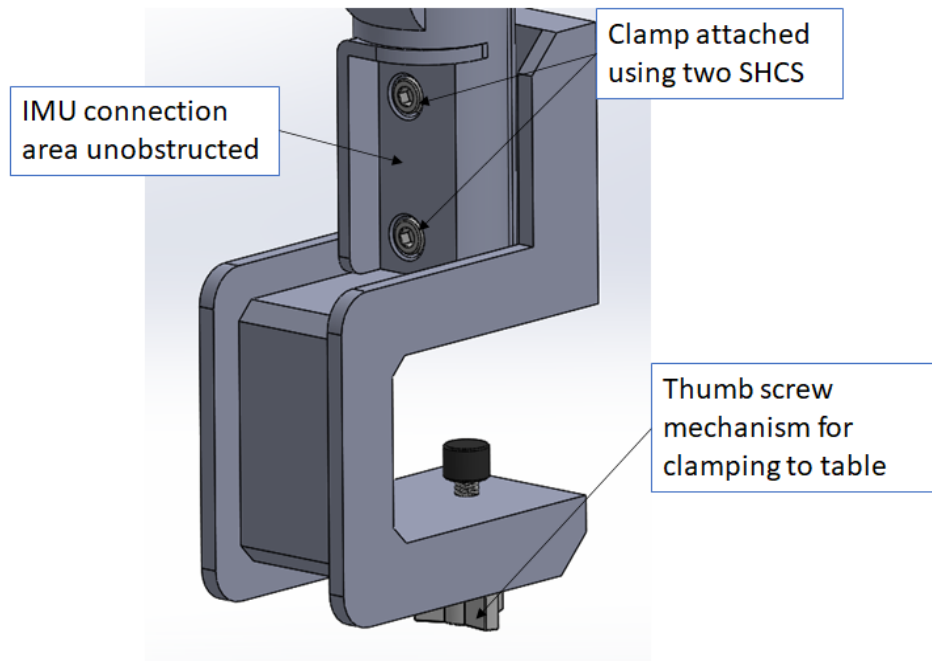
A diagram of the mounting clamp devised for securely mounting the device to a rigid body.
